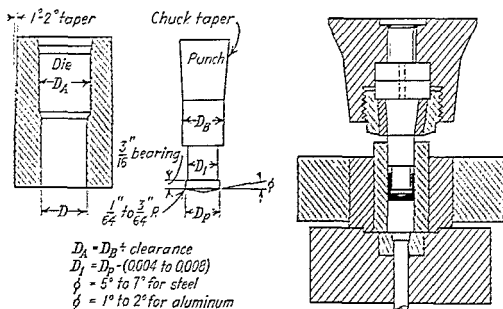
Backward-extrusion die for forming a cup.¹
